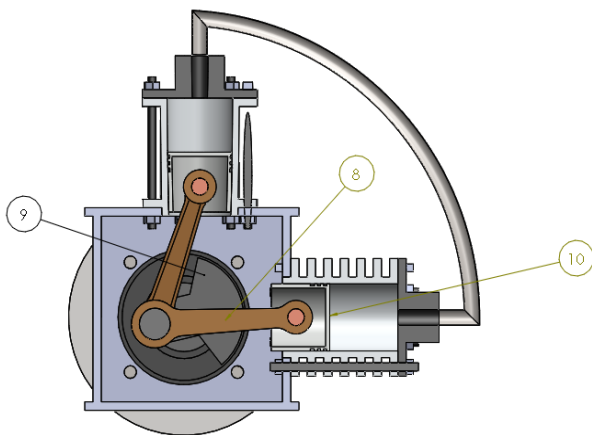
Prototype of the engine in SolidWorks ®. 8. Connecting rod 9. Crankshaft 10. Piston
